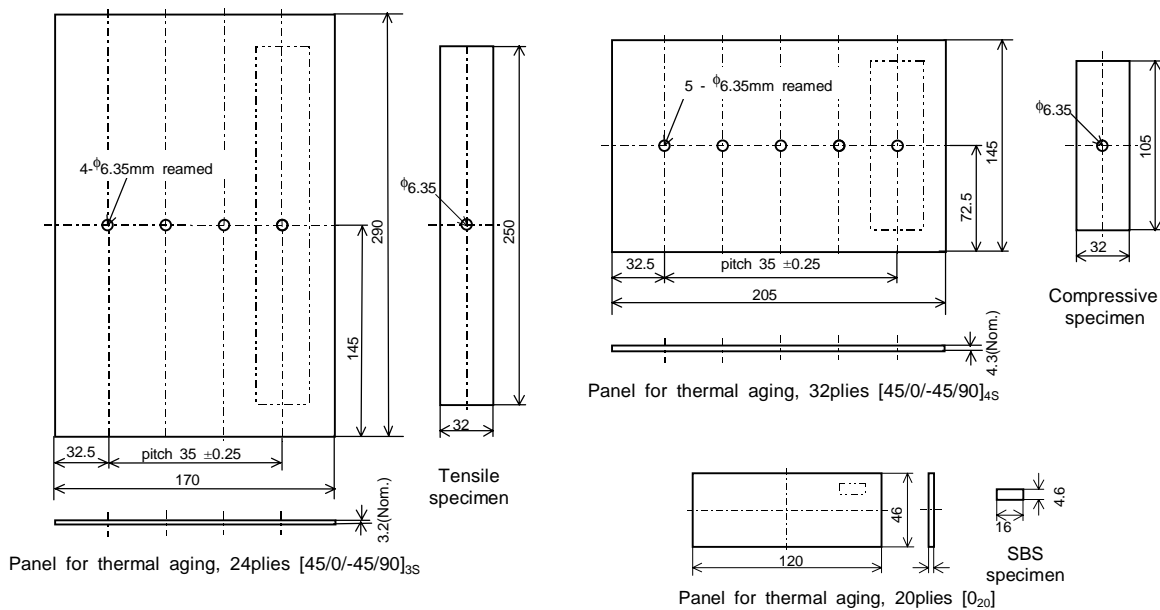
Geometry of panels for thermal aging and specimens tested; dimensions in mm
